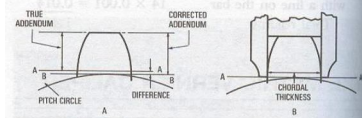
Gear-tooth measurement showing the (A) true and (B) corrected addendum.
